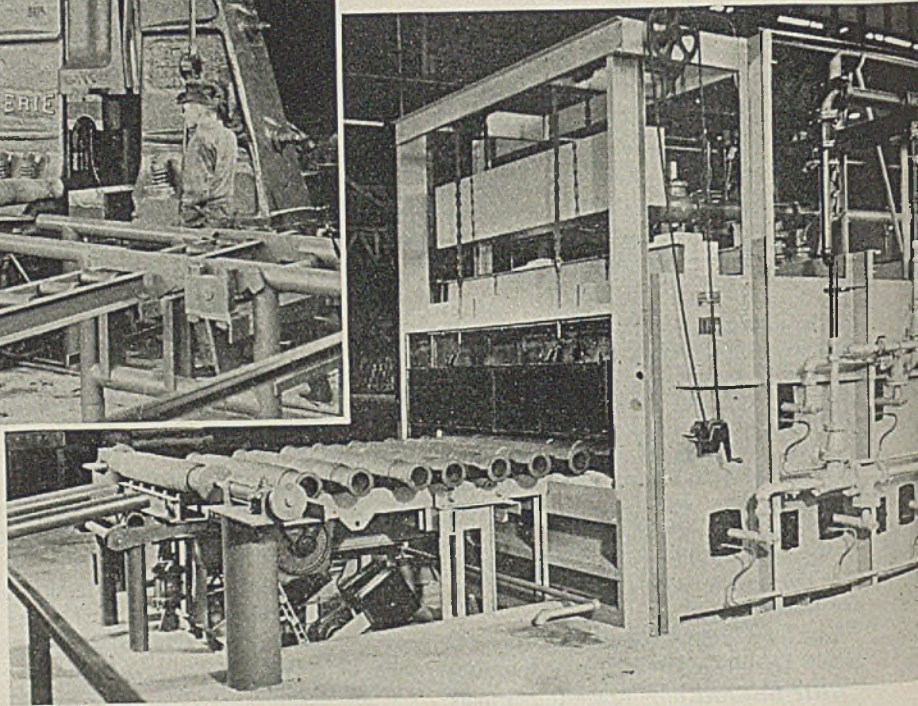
(Above)—After upsetting, tube moves to forging hammer where journal and wheel seat are forged
